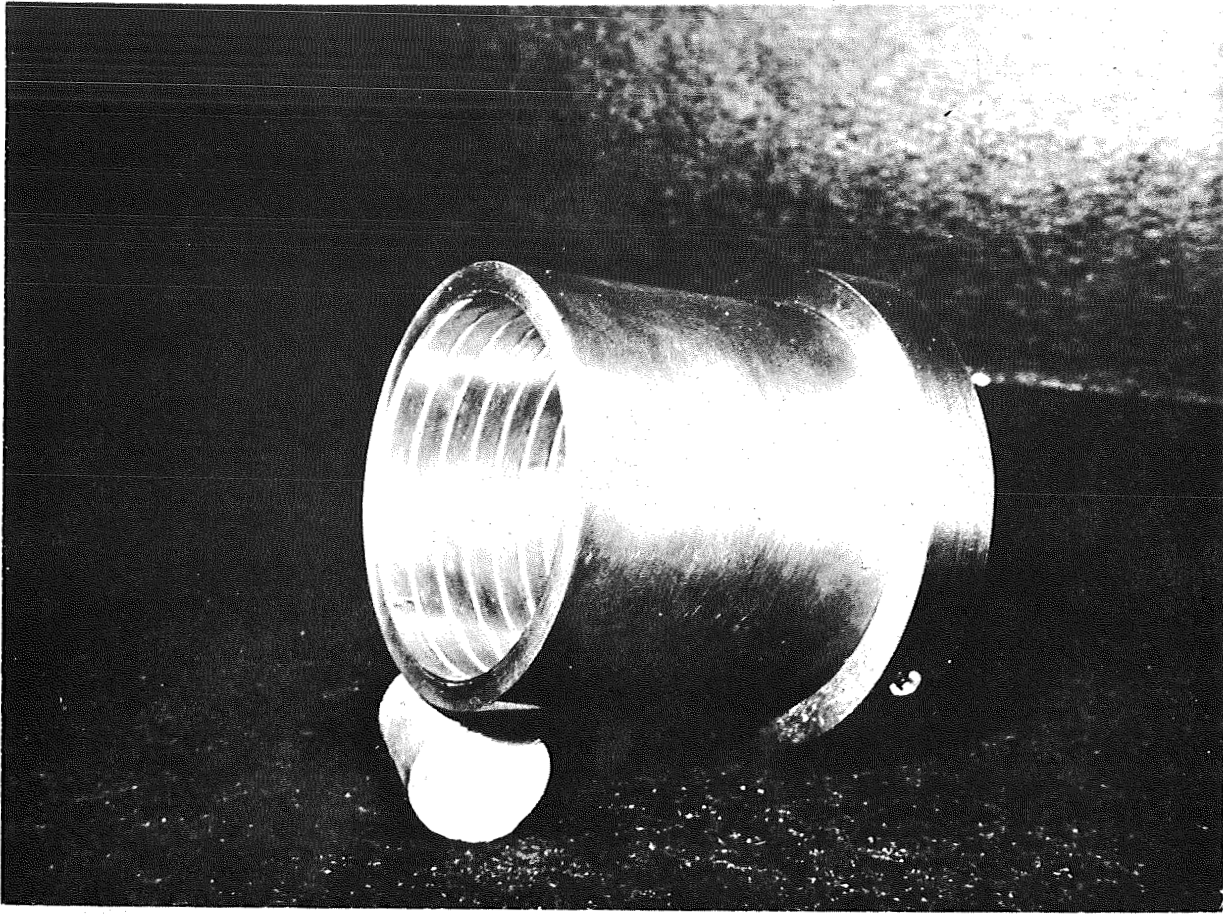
RIBBON WRAP INNER LINER TEST SPECIMEN
